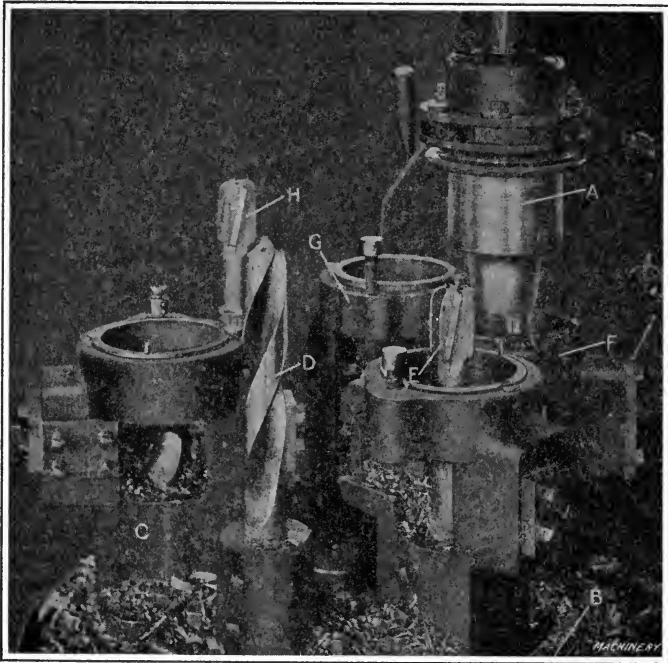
Close View of Tool Equipment of Machine shown in Fig. 3
